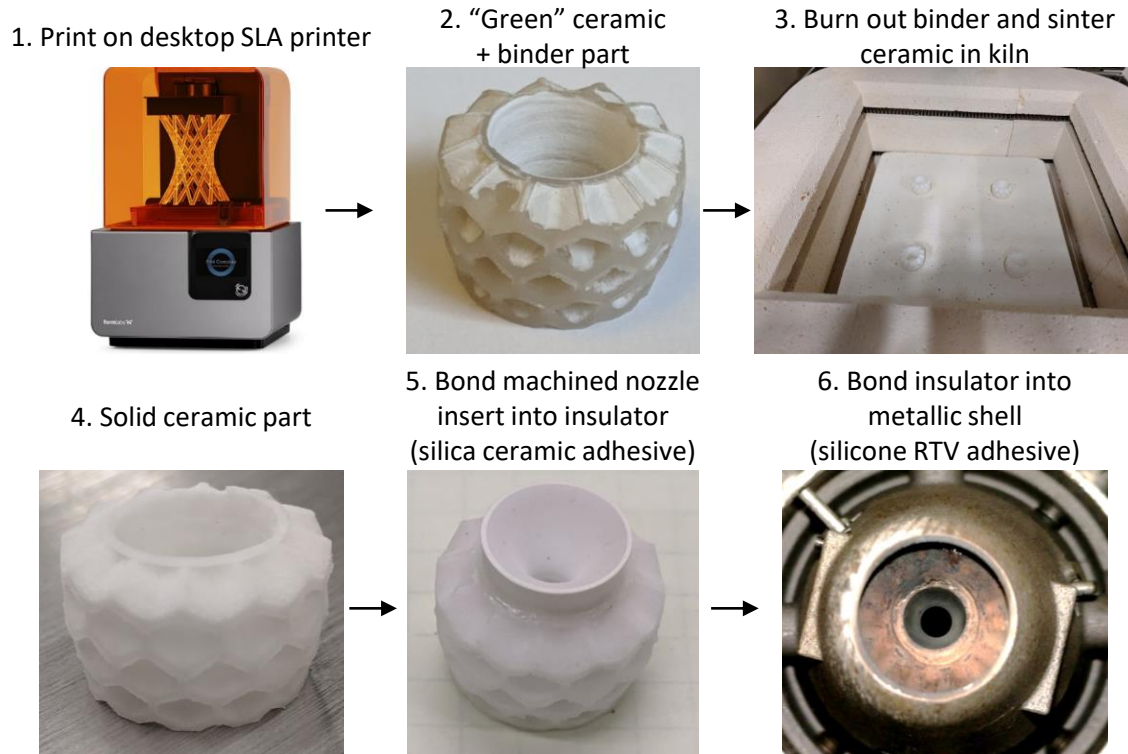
The complex honeycomb geometry is produced by 3d printing a 'green' ceramic+binder part.
